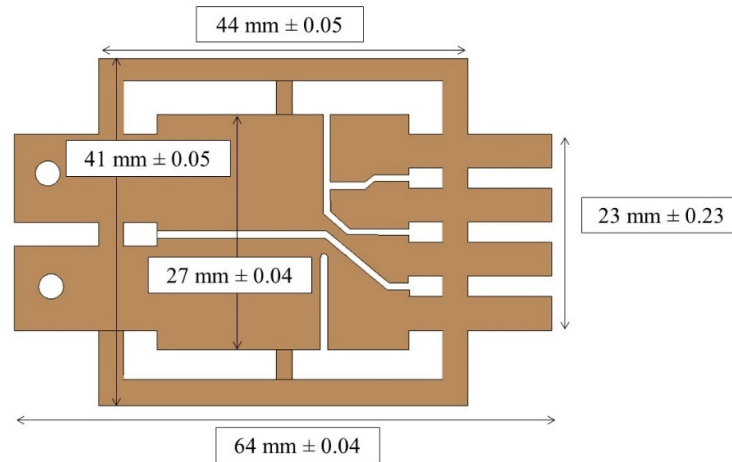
Design and dimensions of lead frame with corresponding tolerances
